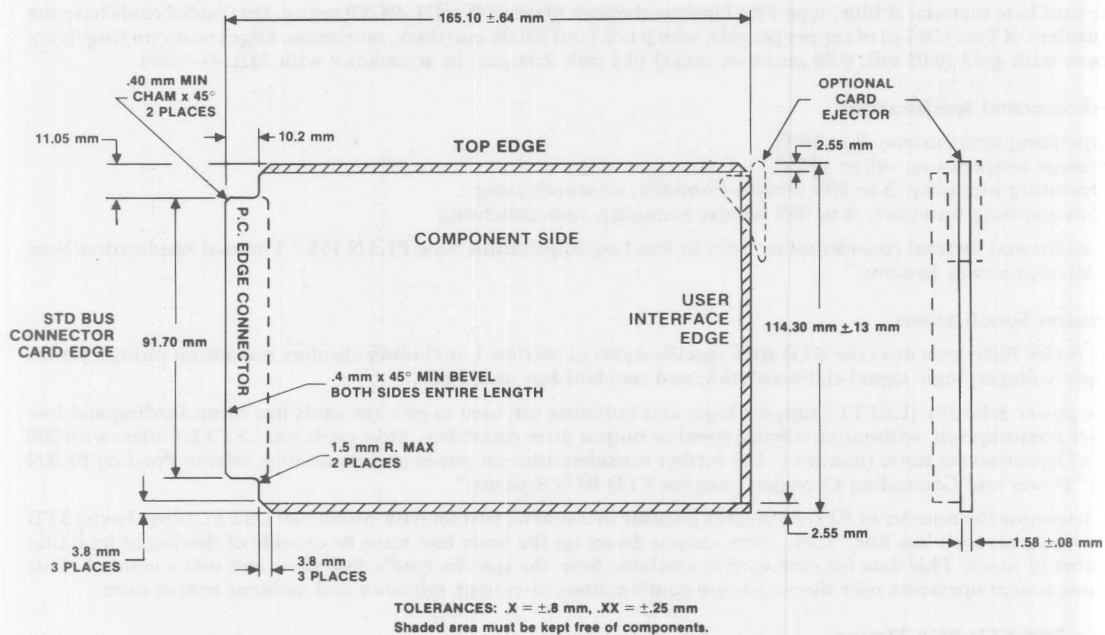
STD BUS Edge Card Finger Design - Metric.
